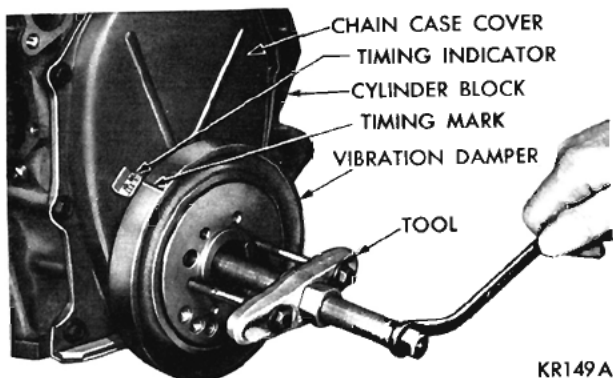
Removing Vibration Damper Assembly Using Tool C-3688
